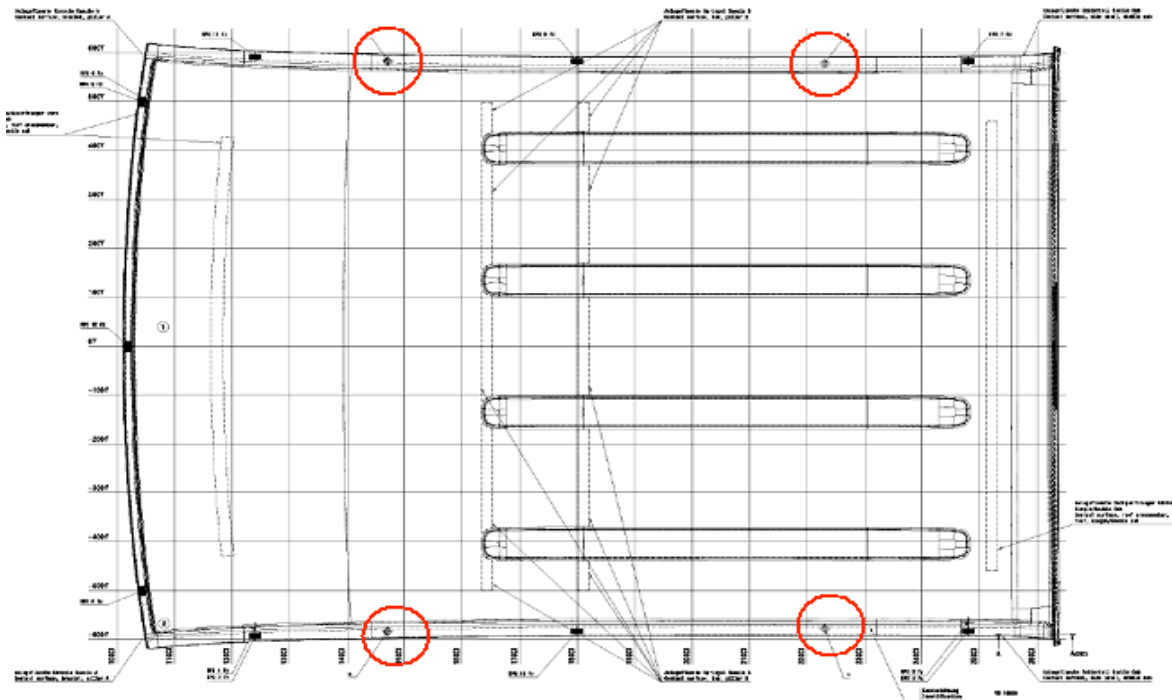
Roof rack bolt attachment points on AMAROK DC (marked in red)
